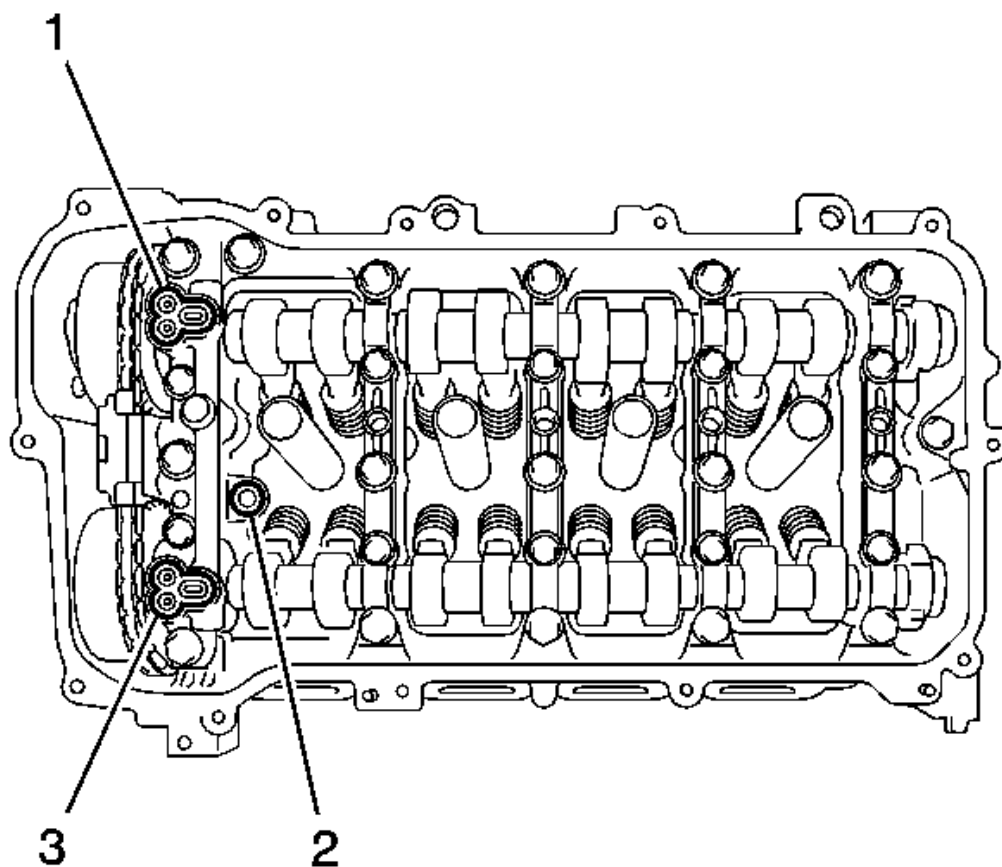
Identifying Camshaft Bearing Cap Gaskets
